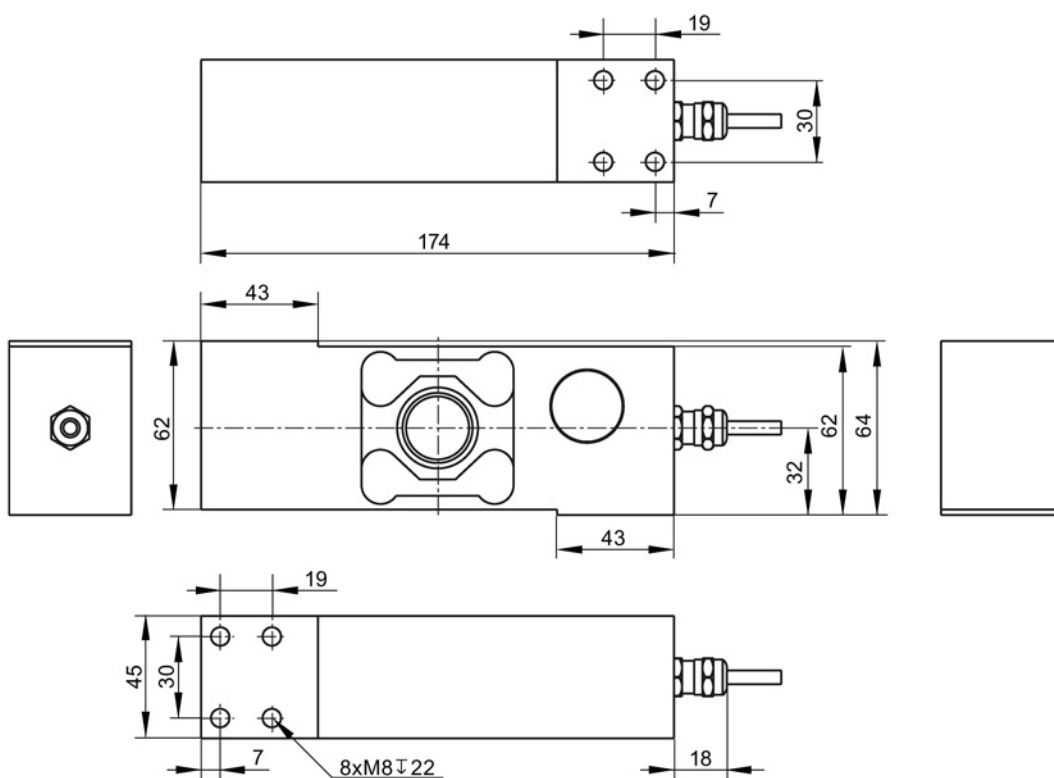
Dimensional drawing SP-S SC 100 to 500 kg
